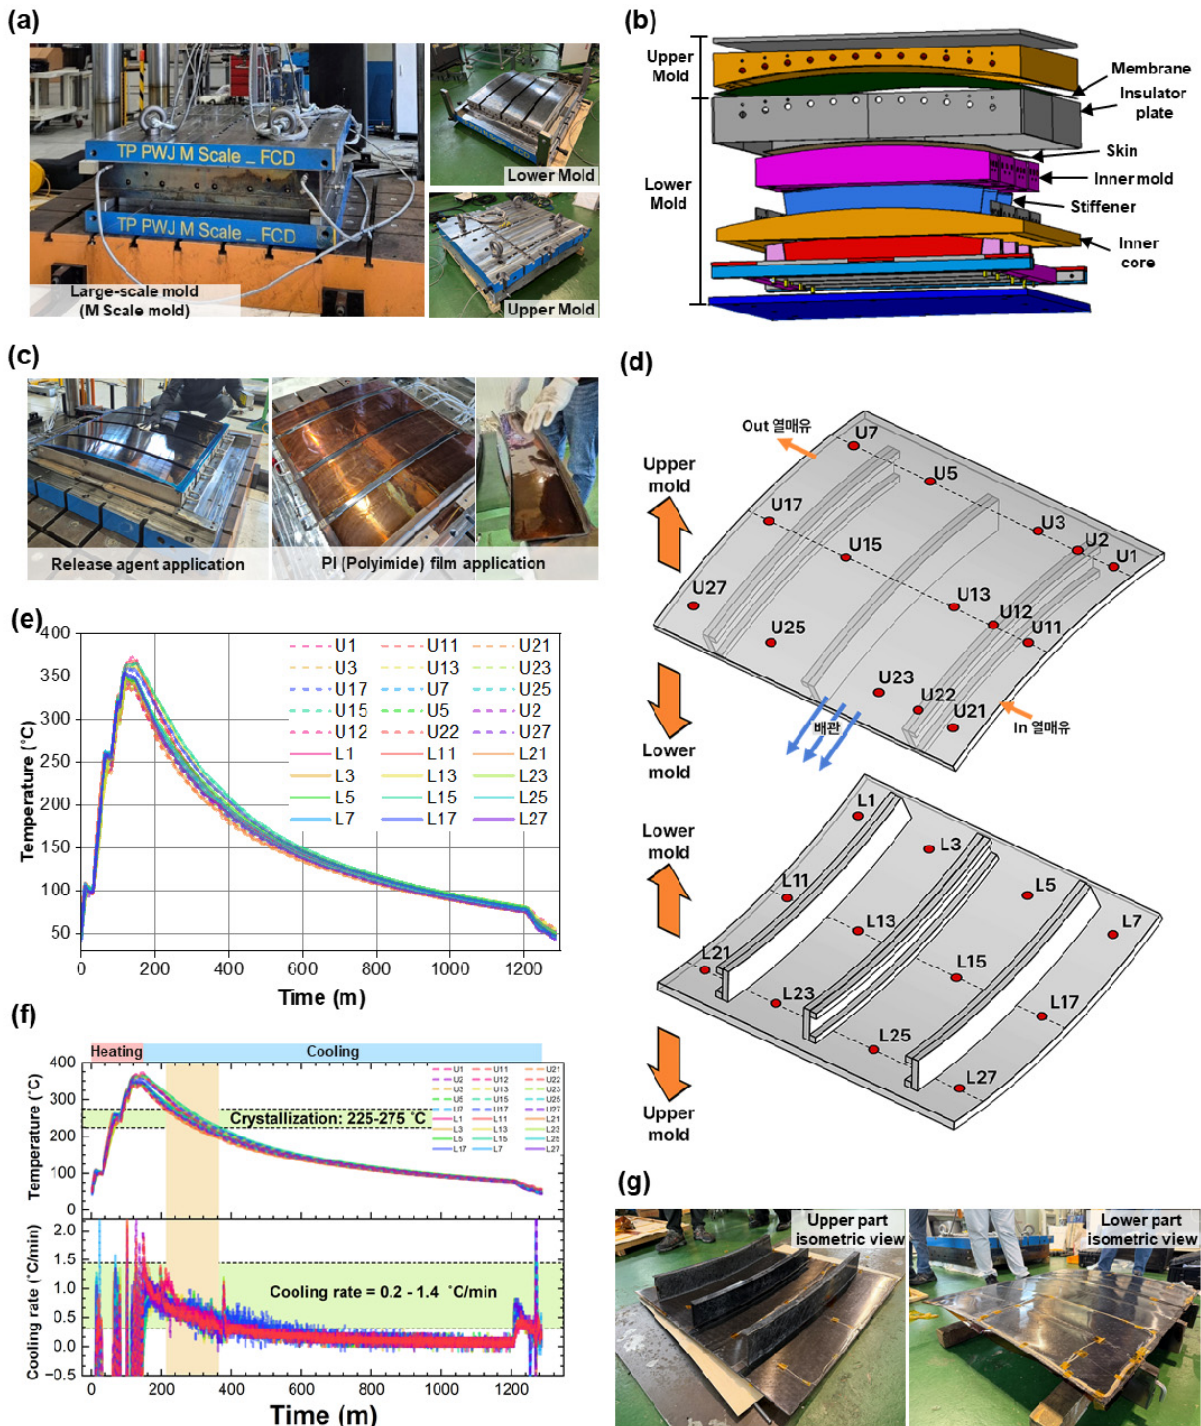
(a) Press welding mold for m-scale part. (b) Mold structure of press-welding for m-scale part. (c) Application of a release agent and a release film. (d) Thermocouple positions. (e) Temperature histories of the part surface. (f) Cooling rate of the part surface. (g) Molded m-scale part using the hydrostatic pressurization-based press welding process
